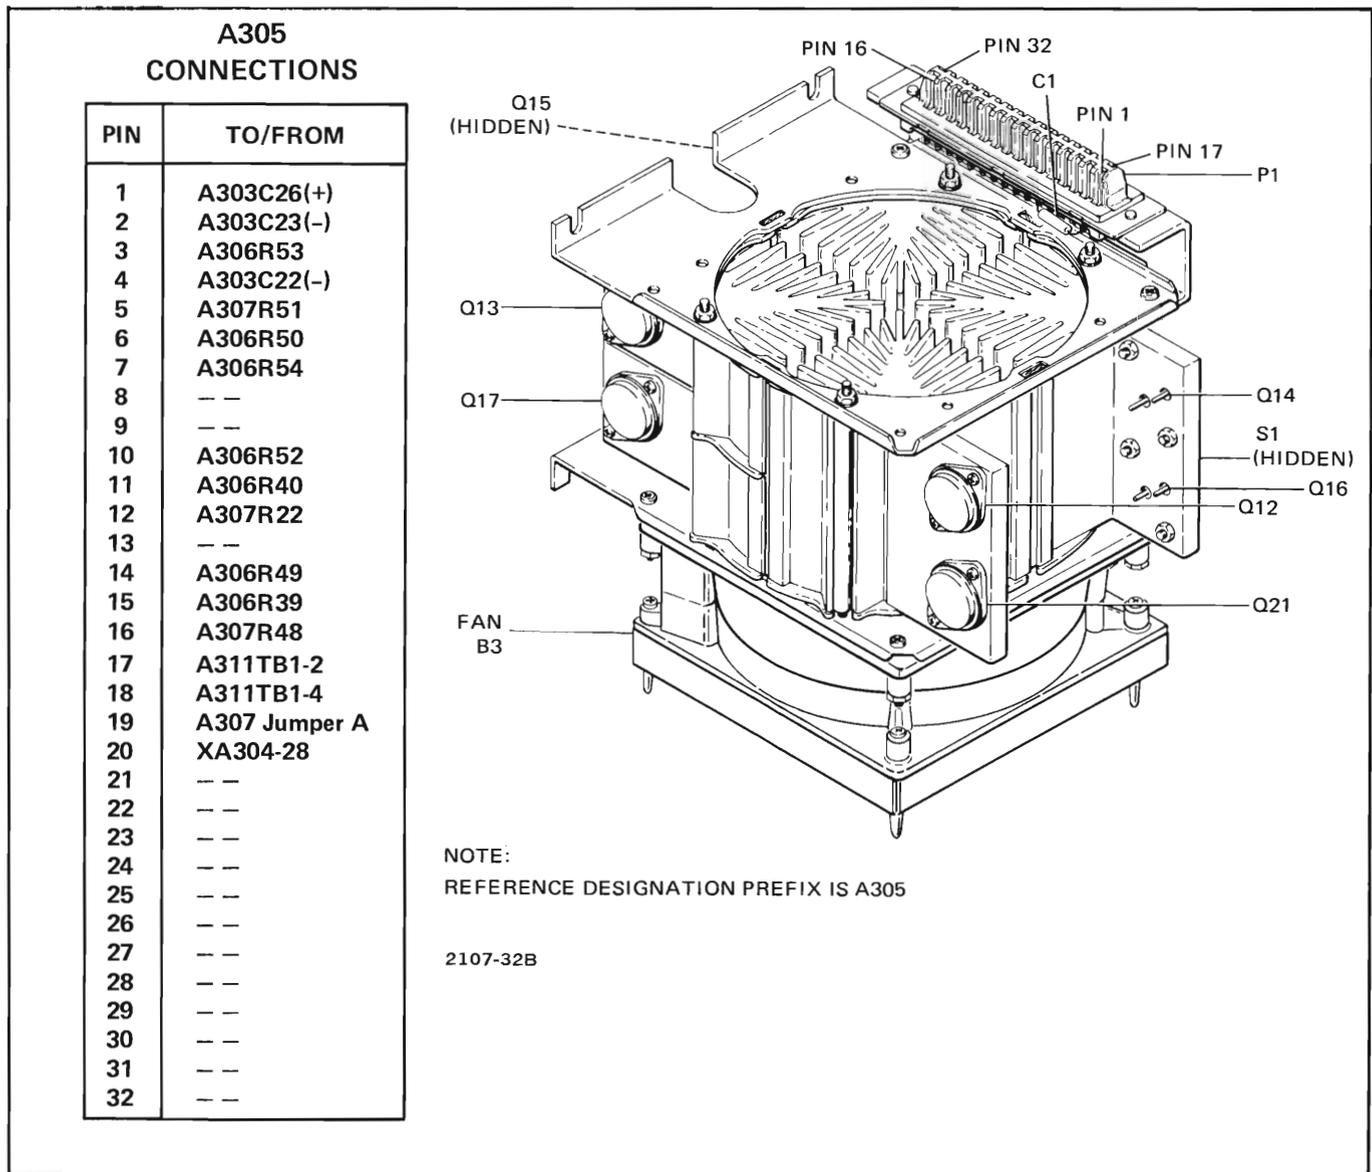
A305 Small Heat Sink Assembly (02116-63238), Parts Location and Connection Diagram
